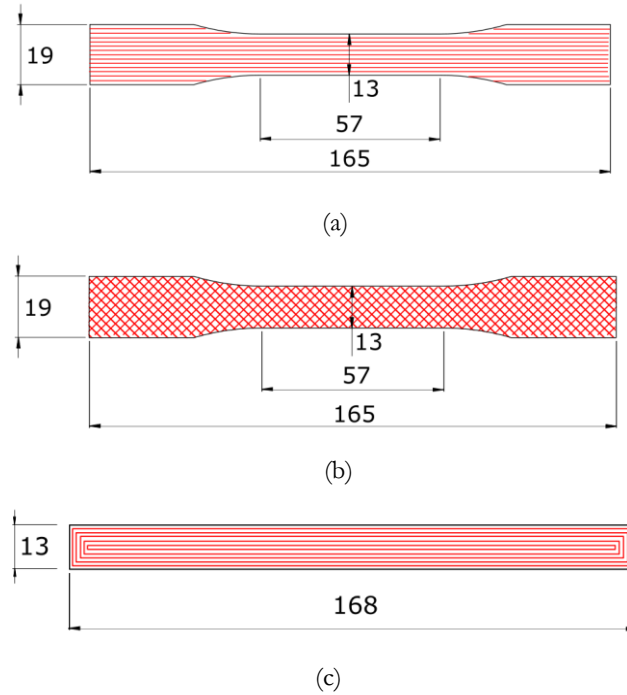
Test samples showing (a) tensile dog-bone, (b) shear and (c) flexural specimen printing fill patterns and specimen dimensions.
